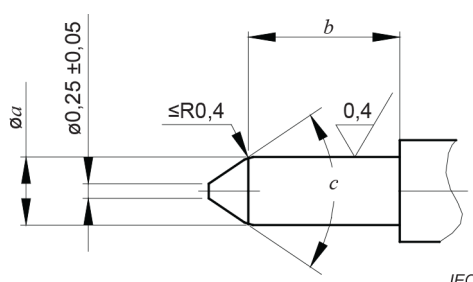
Gauge pin for socket centre contact (for dimensions, see Table 3)
